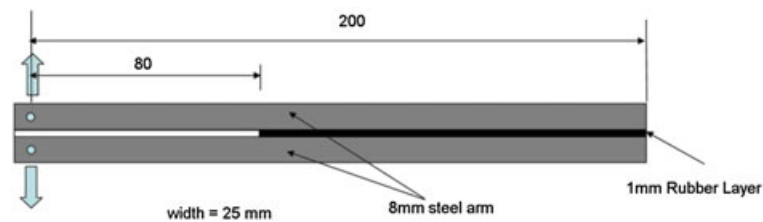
Geometry and loading of the tested double-cantilever-beam specimen.
